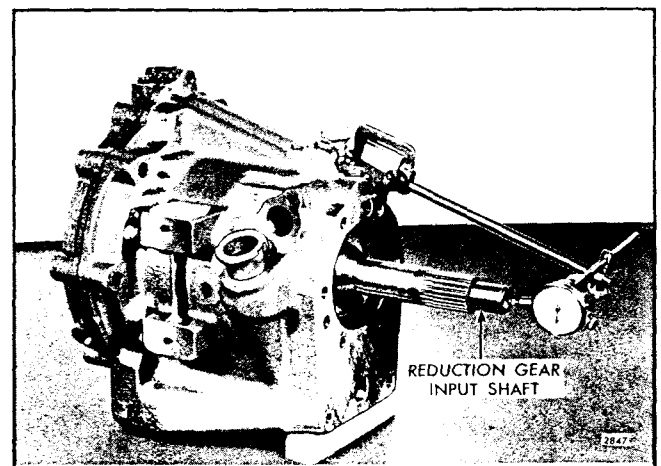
Checking Reduction Gear Input Shaft End Play
